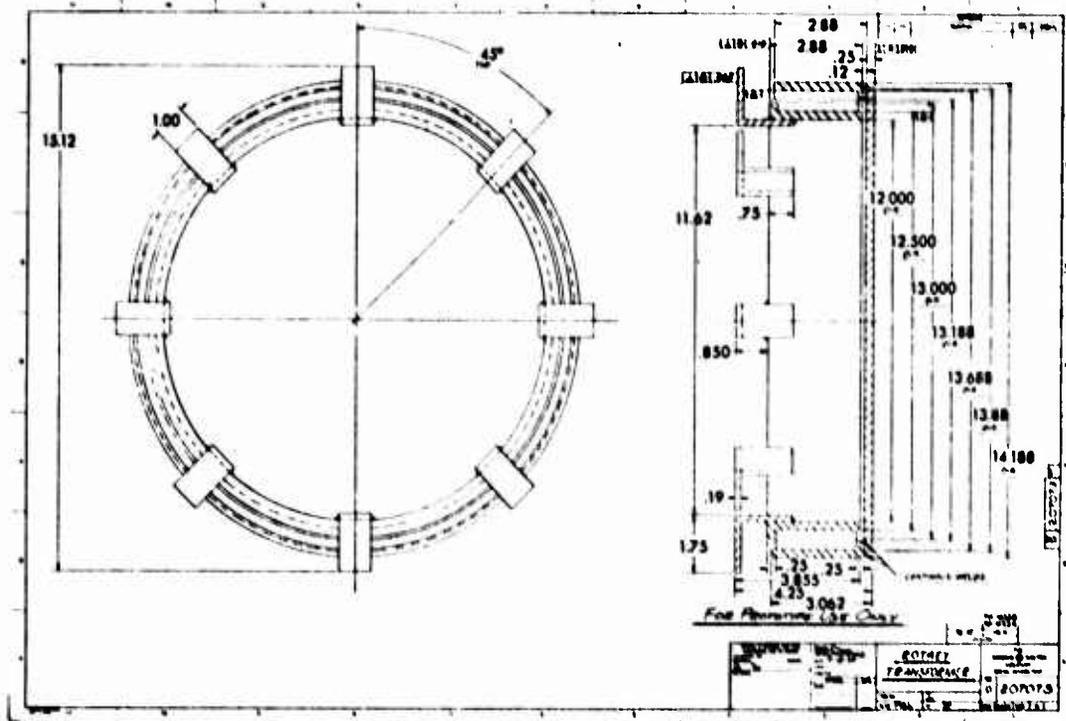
Prototype Rotary Transformer Fully Compatible with the UH-60A Tail Rotor Gearbox and Deicing Unit
